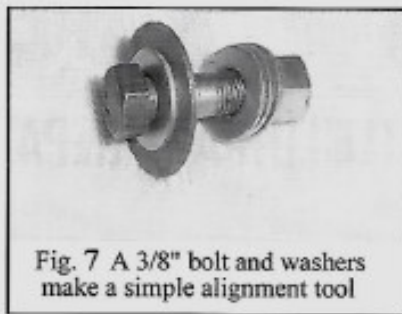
A 3/8" bolt and washers make a simple alignment tool
